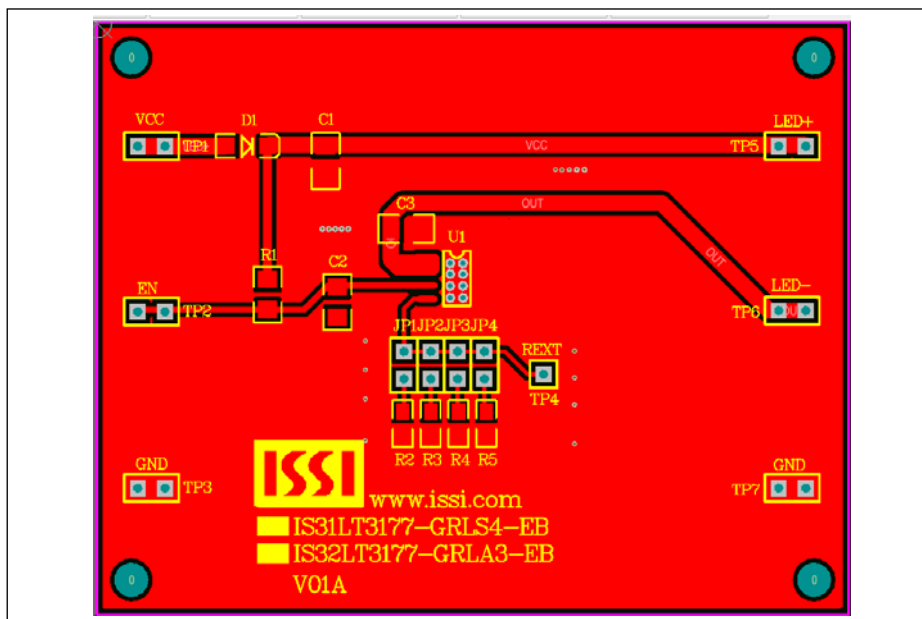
Board PCB Layout - Top Layer (SOP-8-EP)
